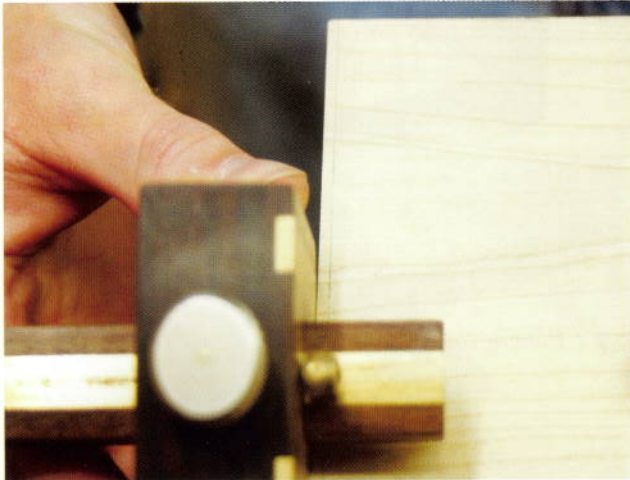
Holding the blank and the backer piece in the vice and scratching the "v" into the end grain of the blank
